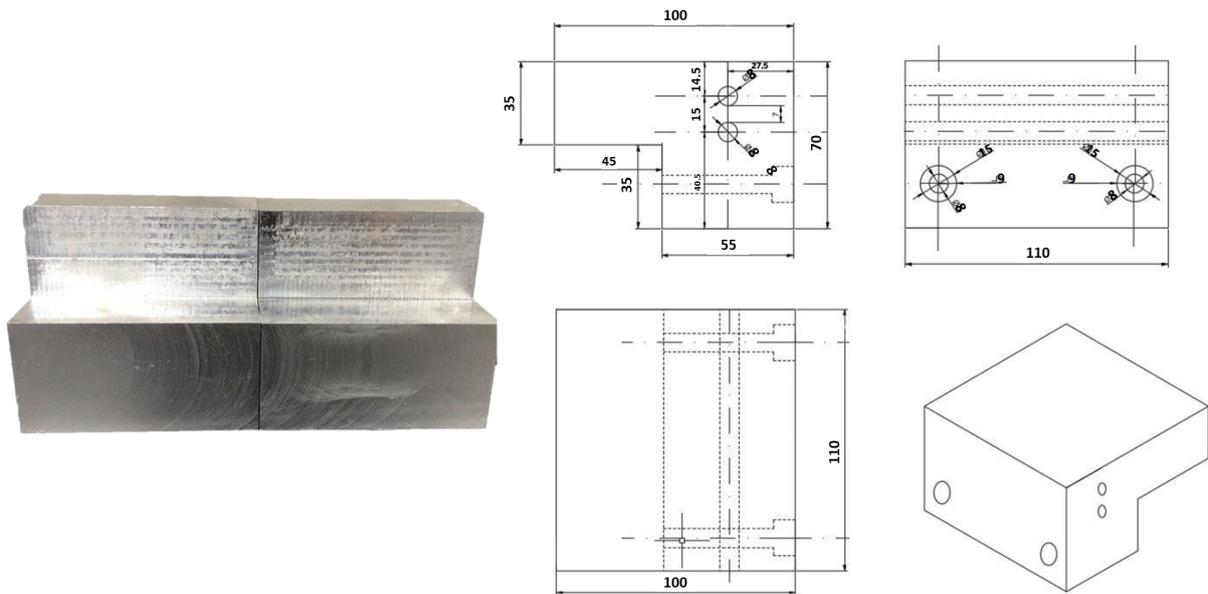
Designed fixing aluminum parts, real picture (left), and mechanical drawing (right)
